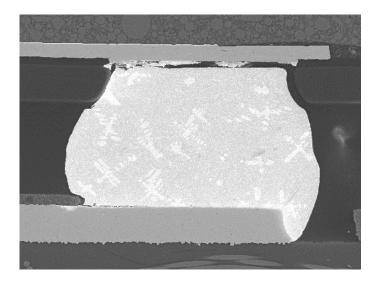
Cross Section of Failed Solder Joint (No Underfill).
